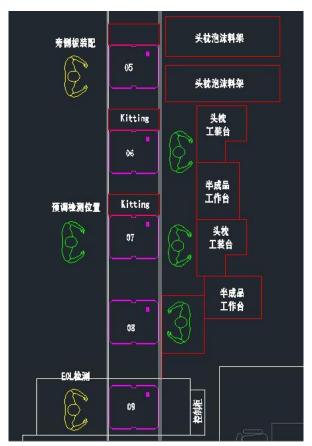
NEW HEADREST ASSEMBLY LAYOUT
